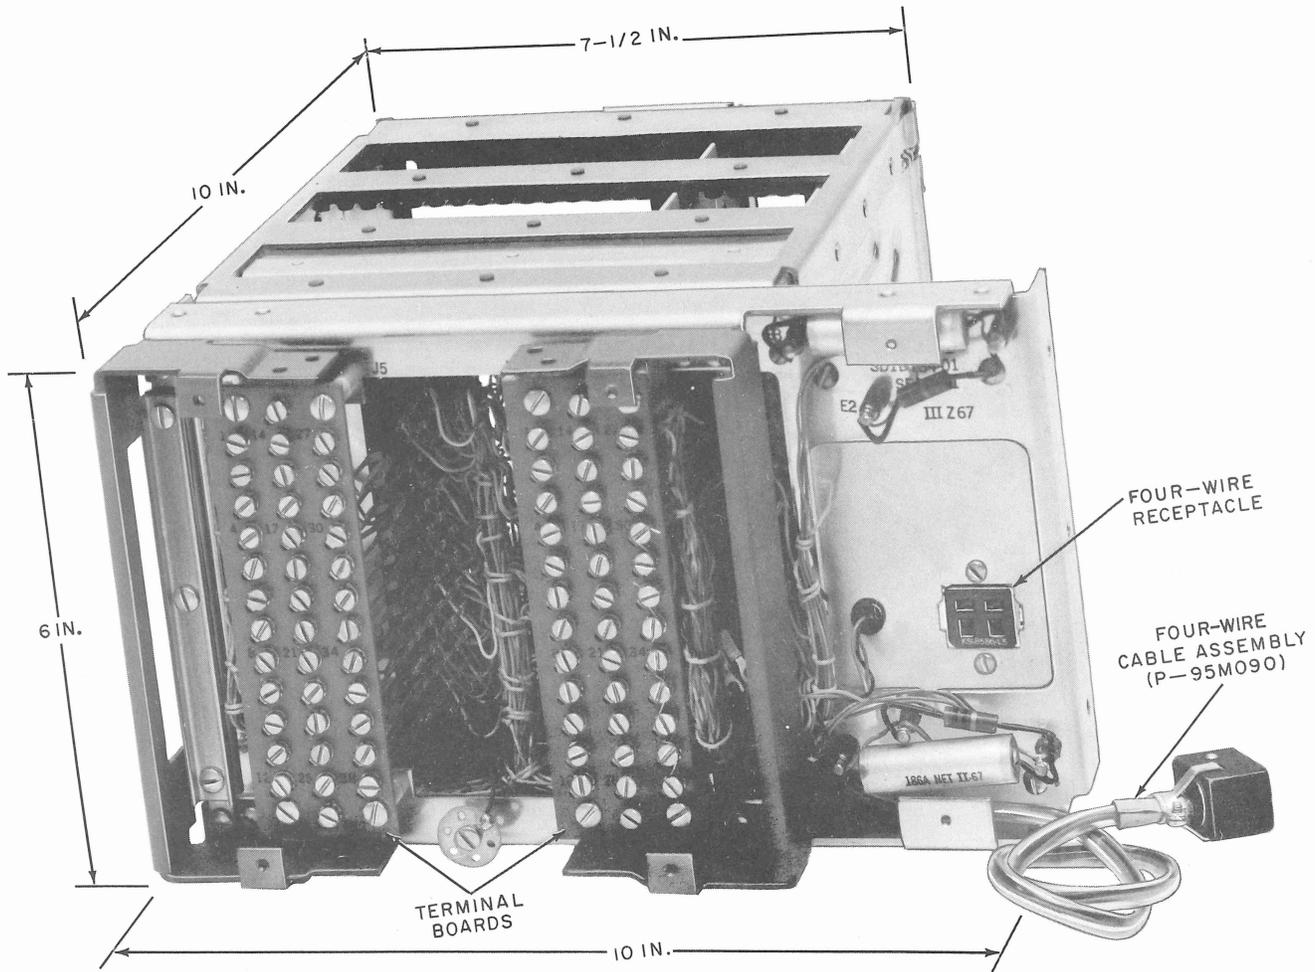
Data Auxiliary Set 824B1, Rear View, Covers Removed
